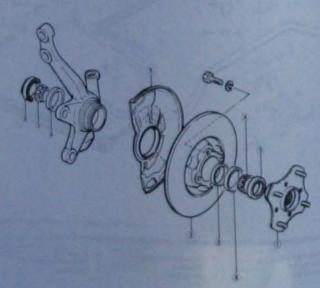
Exploded view of the front swivel hub assembly (Sec 2)
